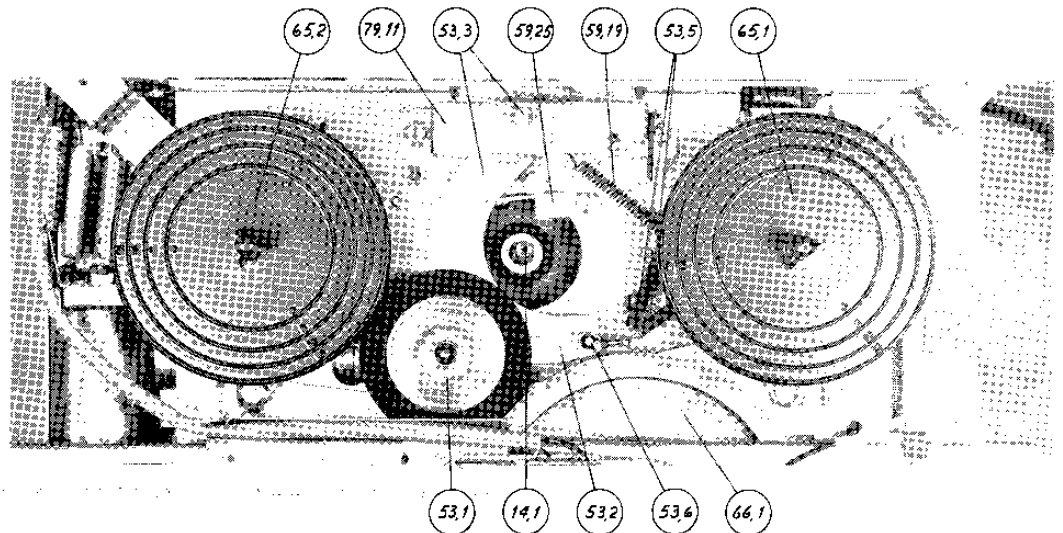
Close-Up-View, Speed Change Mechanism, Motor Pulley and Belt Removed
